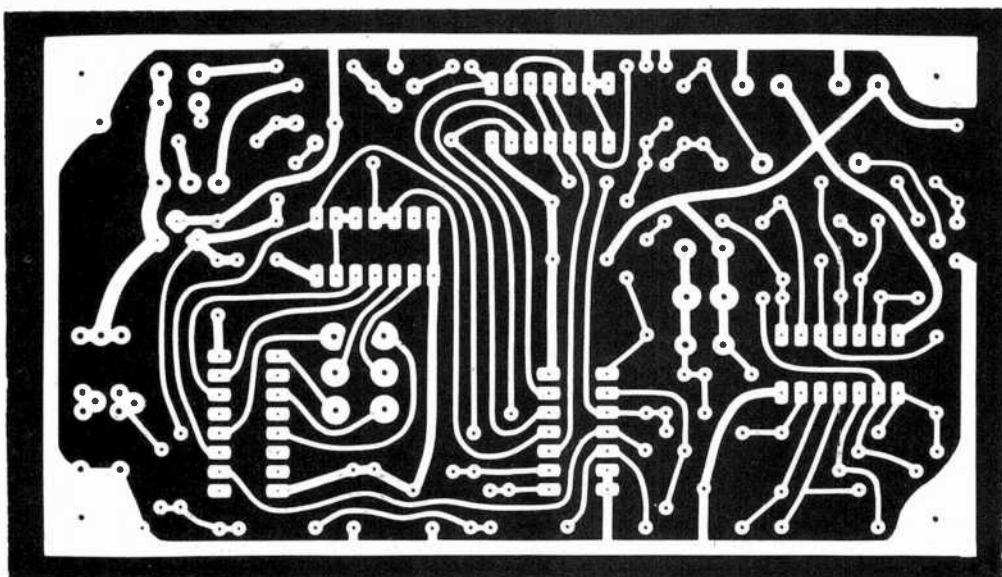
Full-size etching and drilling guide for the receiver pc board.
